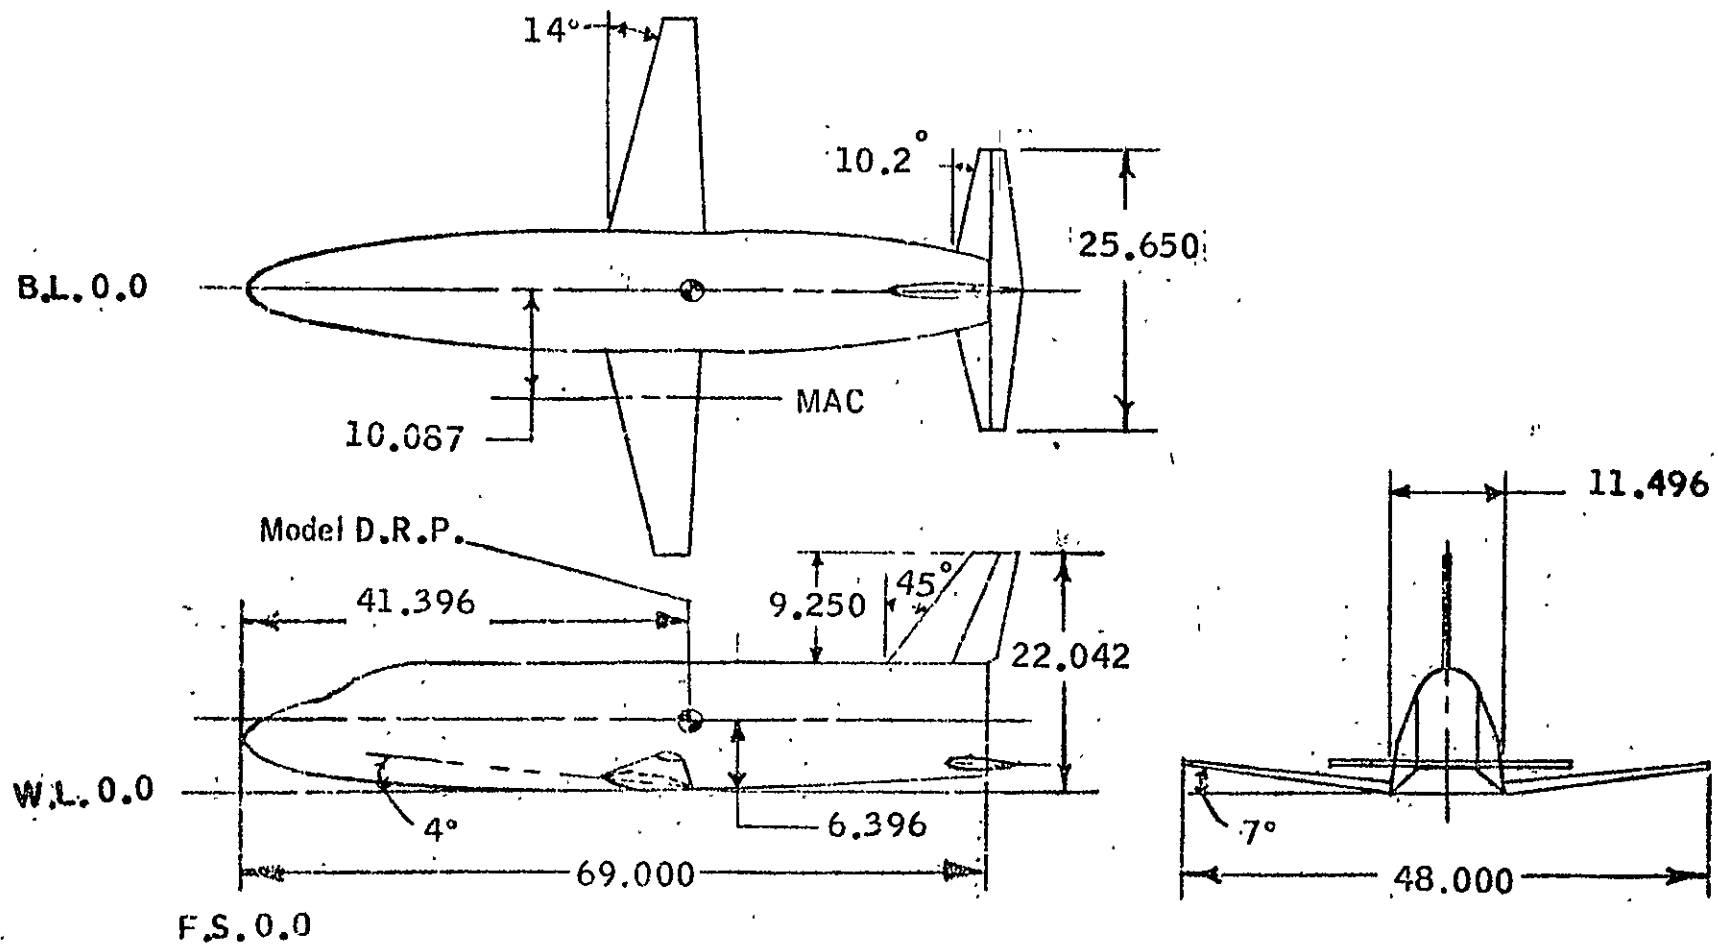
Model geometry. Configuration B₁W₂H₆V₃ (all dimensions in inches)
